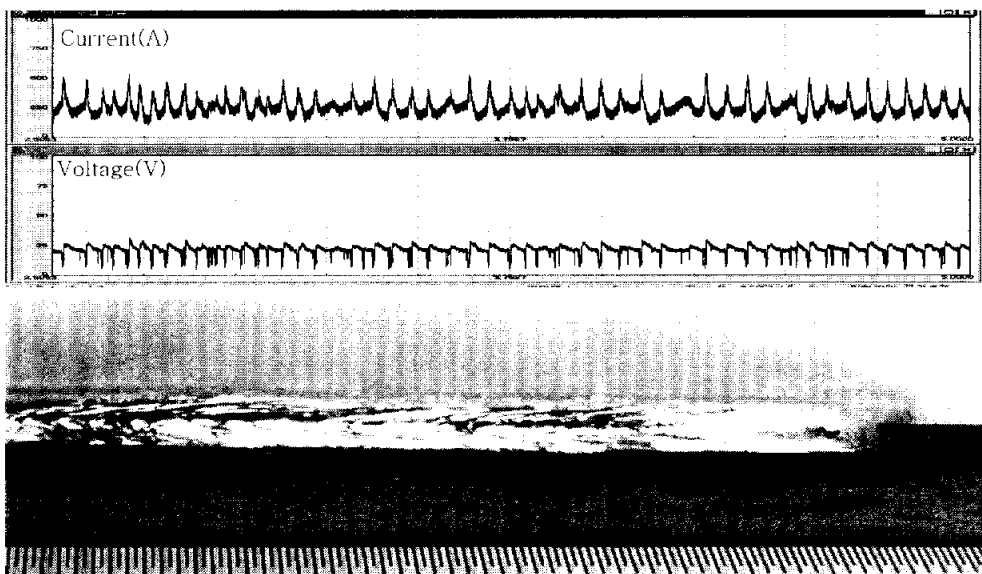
Waveforms and bead shape at welding current 263A
